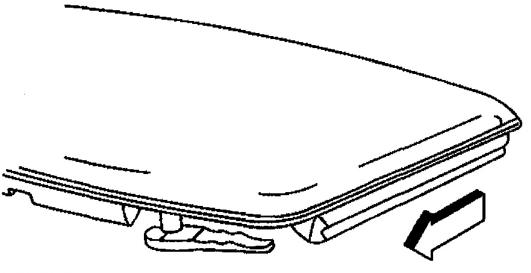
Installing Locator Bracket Mounting Bolts Courtesy of GENERAL MOTORS CORP.
